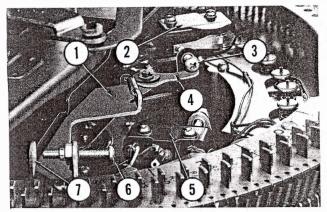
ACTUATING SCREW ADJUSTMENT, CARRIAGE SWITCH
